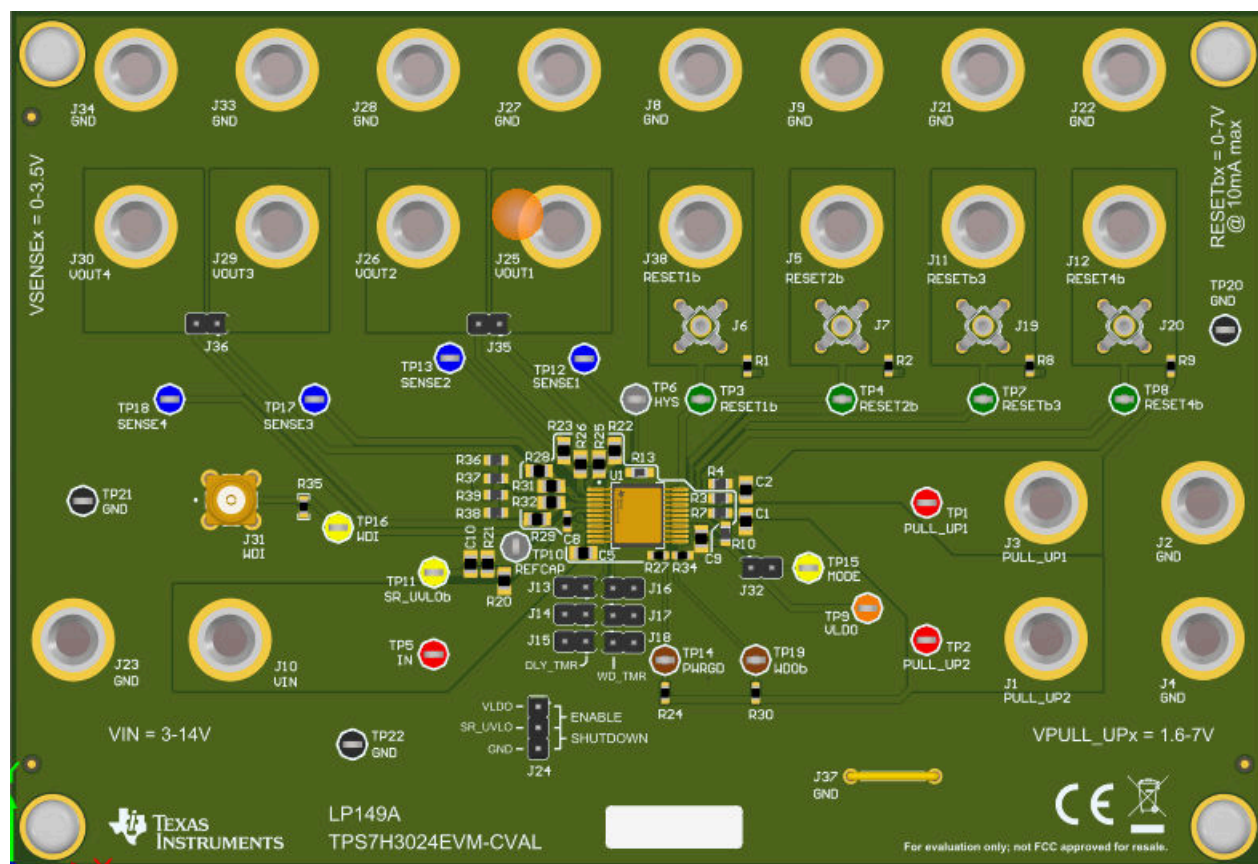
Printed Circuit Board Layout Example: Top Layer
